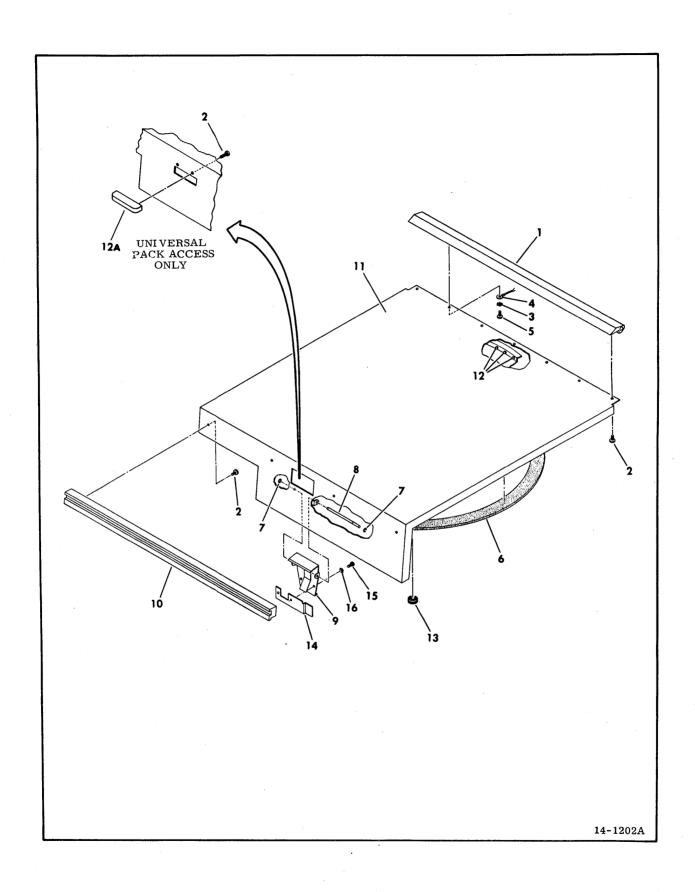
Pack Access Cover Assembly - Nonacoustic 83322150 W
